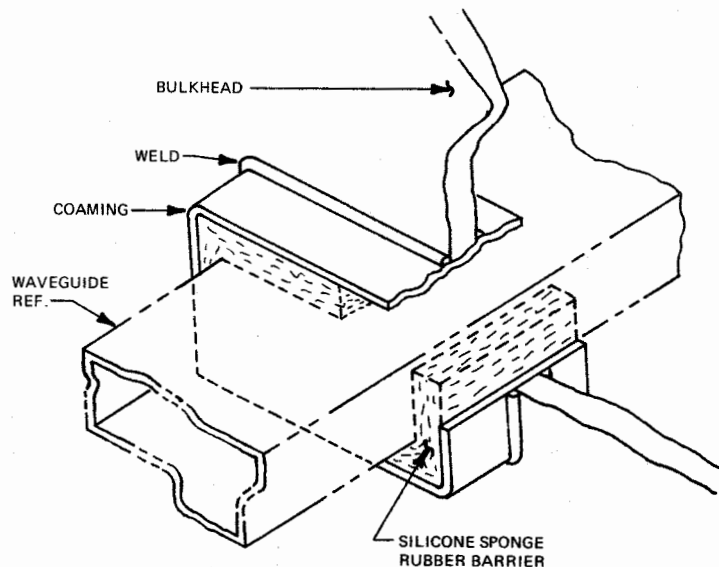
Typical Method of Penetrating Airtight Bulkheads
